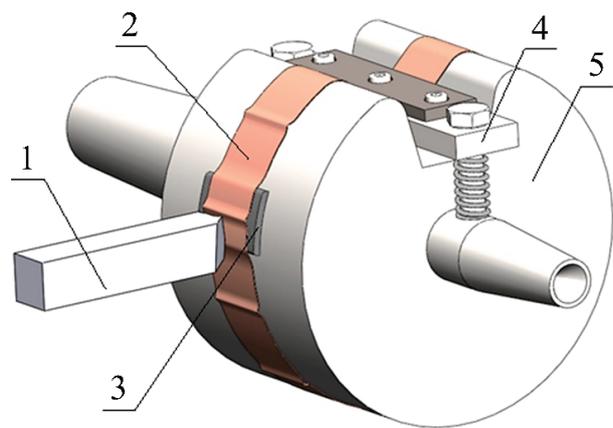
Scheme of cutting through a single corrugation using a barrel attachment
